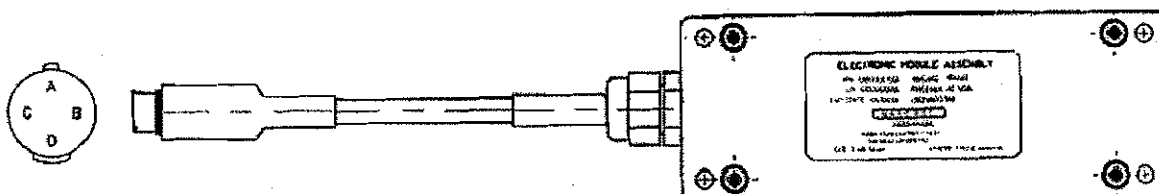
Electronics Module Assembly (EMA) Pin-Out Diagram
